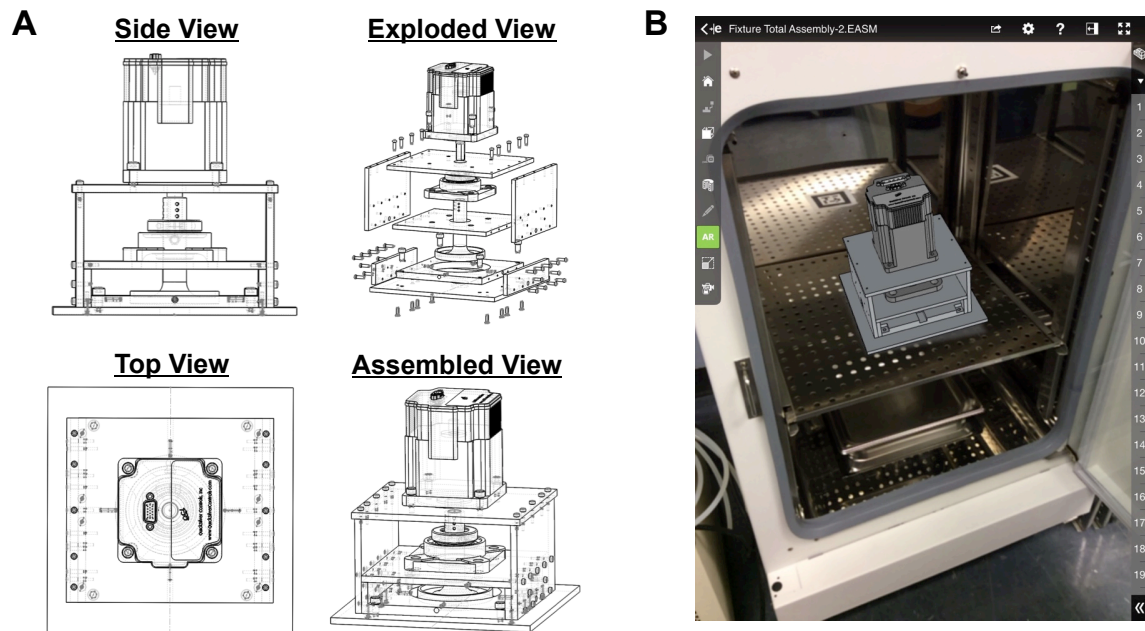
Design of cone-and-plate device. (A) Side, top, exploded, and assembled views in SolidWorks. (B) Picture of device in incubator using the virtual reality feature on eDrawings app (SolidWorks) for Apple iPad.
